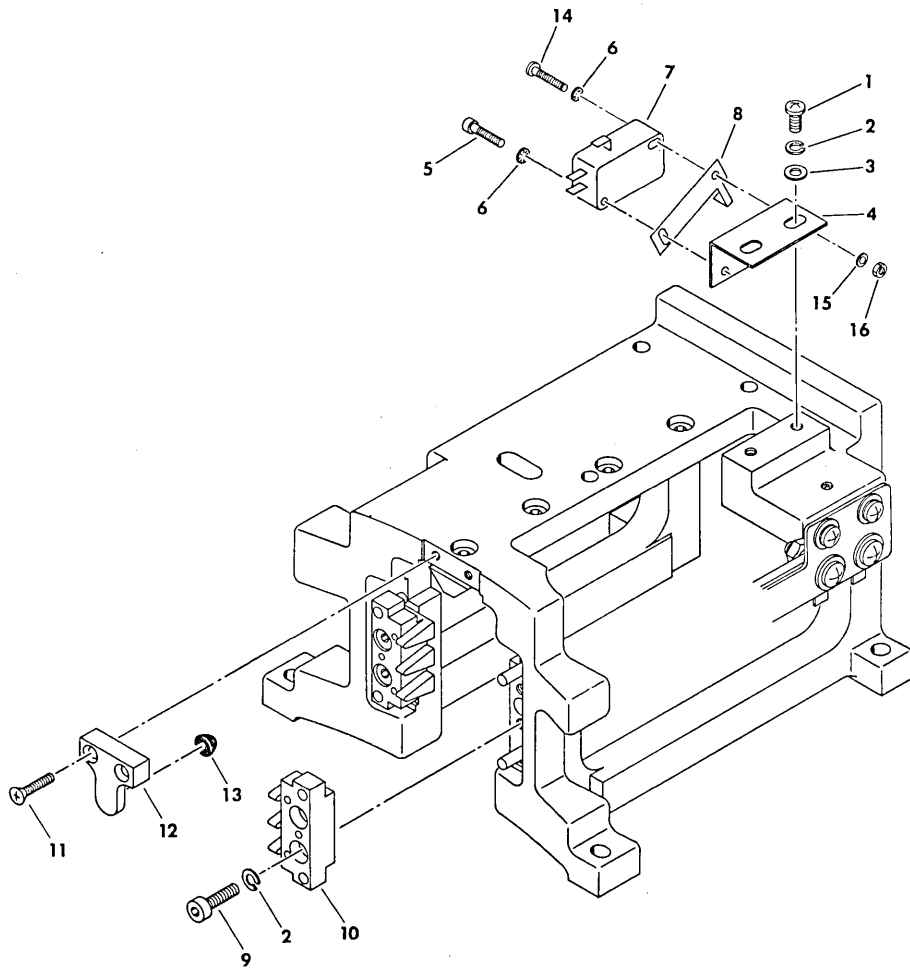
CARRIAGE AND COIL ASSEMBLY
